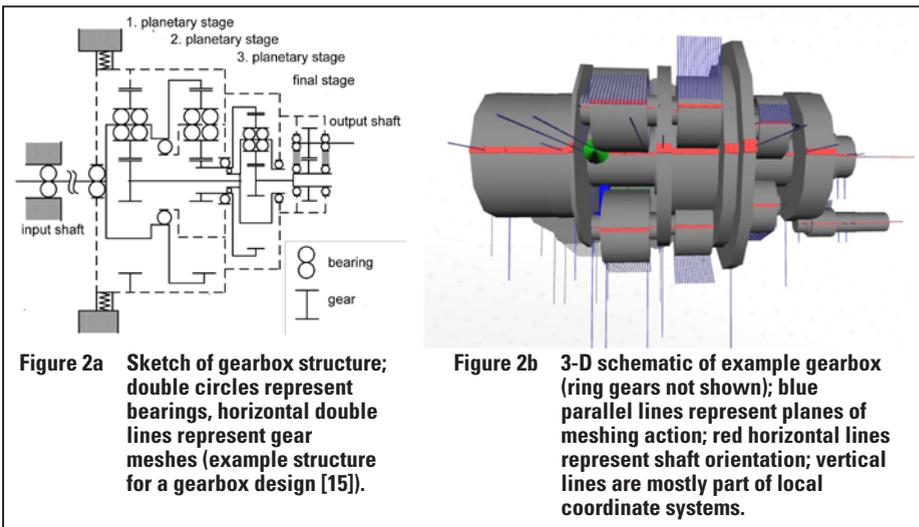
Sketch of gearbox structure; double circles represent bearings, horizontal double lines represent gear meshes (example structure for a gearbox design [15]).
